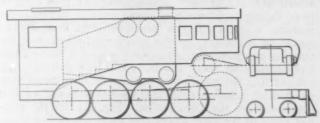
Arrangement for driving the D-H locomotive through reduction gears
